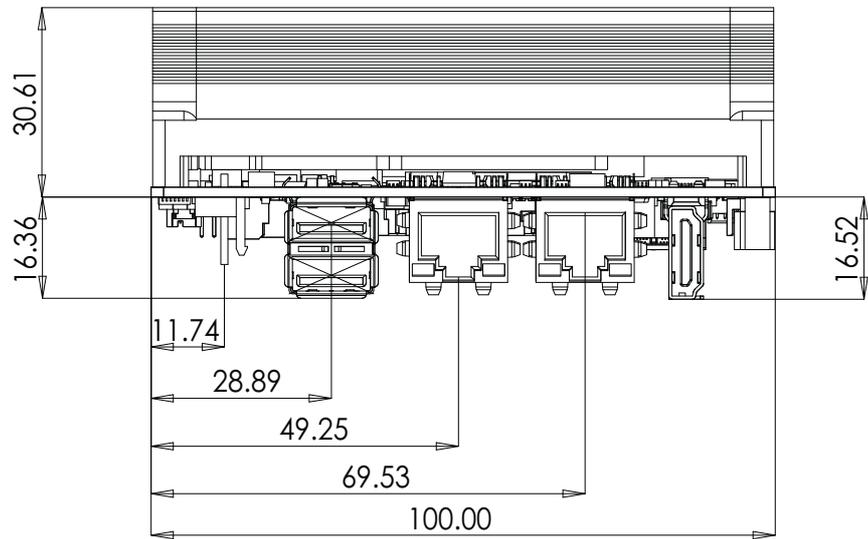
MIO-2361 Mechanical Drawing (Side View with Heatsink)
